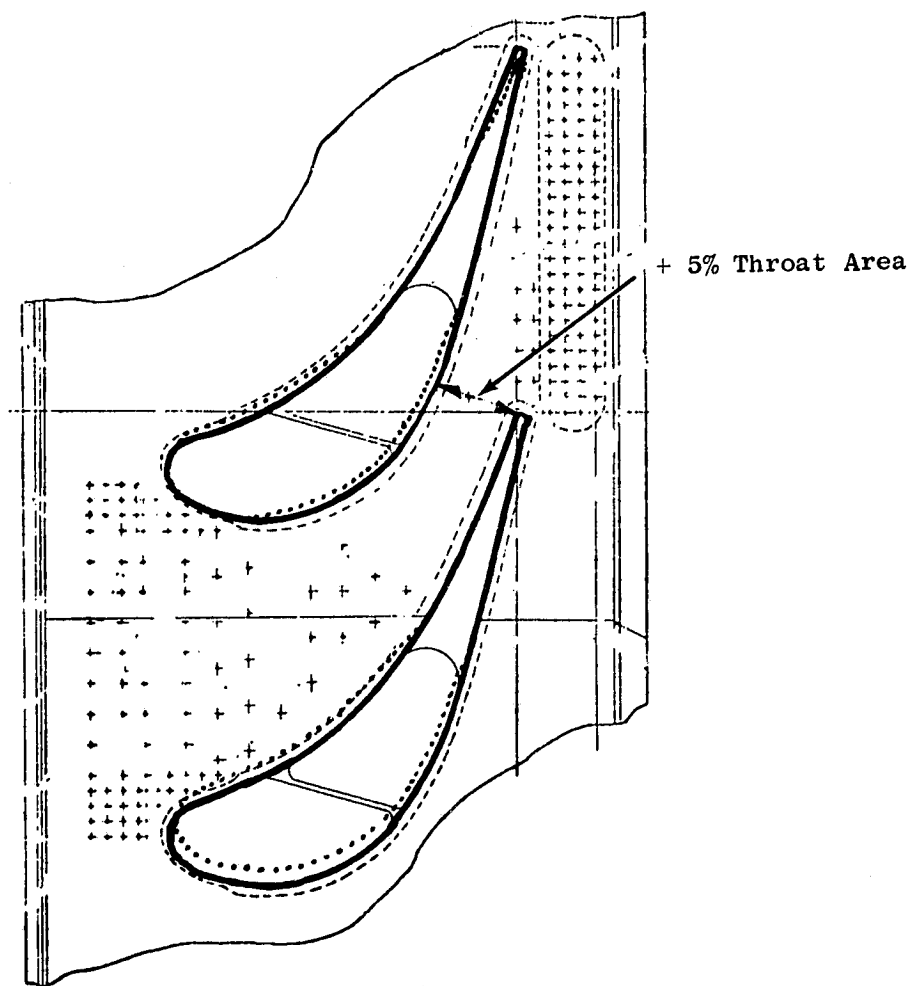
High Pressure Turbine Stator Stage I Nozzle Assembly.
